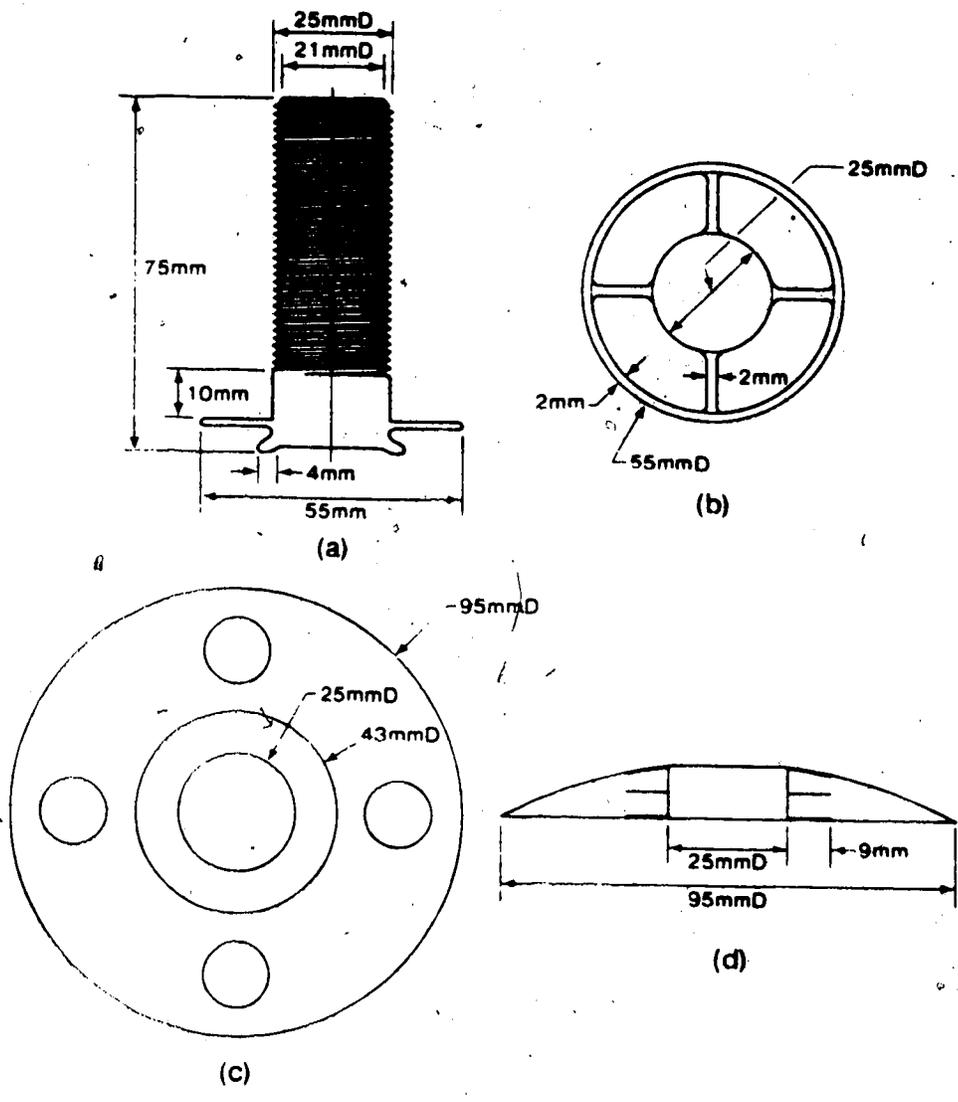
Delrin nylon intestinal cannula and associated components: (a) side view of intestinal cannula showing the threaded barrel (b) cannula top view showing peritoneal ring (c) top view of plastisol ring with embedded nylon nut (d) side view of plastisol ring.
